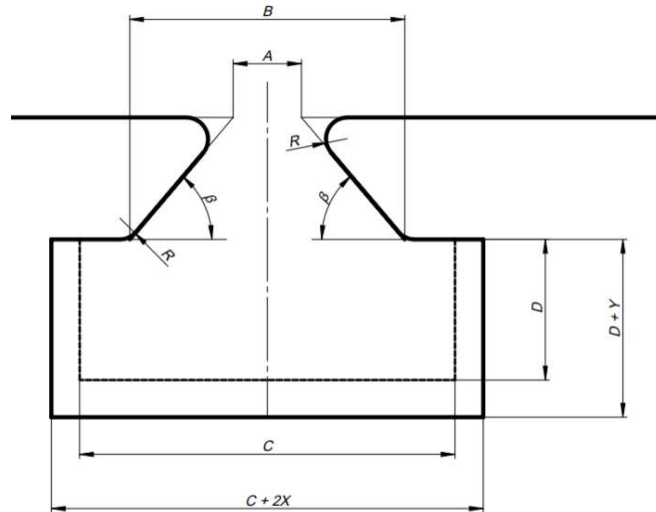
Blade Slot Profile Dimensions Adjusted for Spacer
